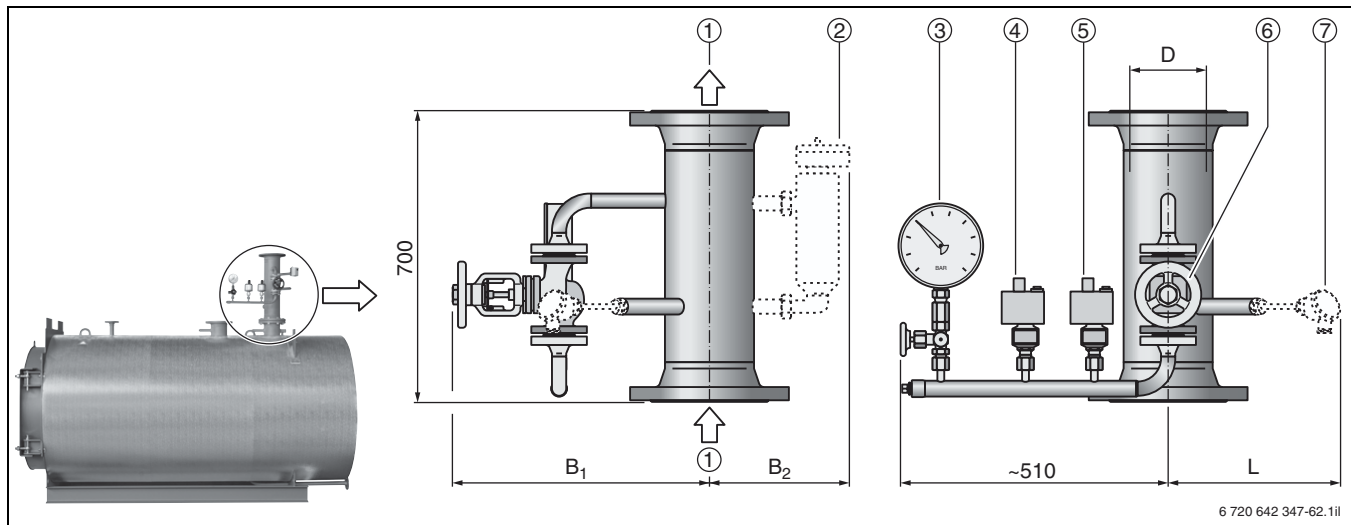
Boiler safety equipment assembly for Logano S825L/L LN and Logano plus SB825L/L LN (intermediate flow piece with valve distributor and valves; dim. in mm)
